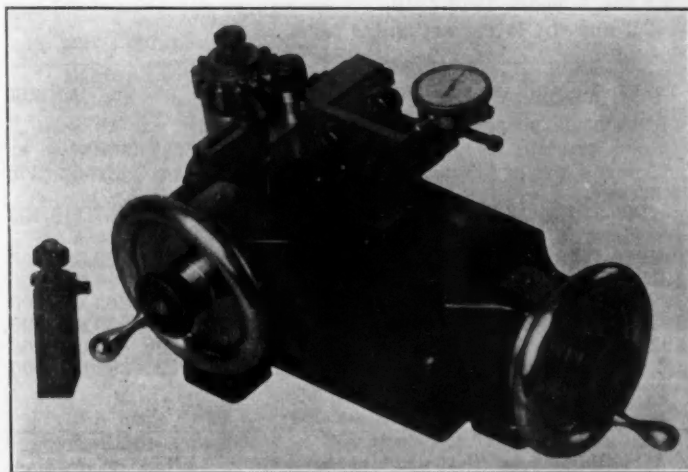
GEAR-TESTING DEVICE ARRANGED FOR CHECKING TOOTH SPACING
